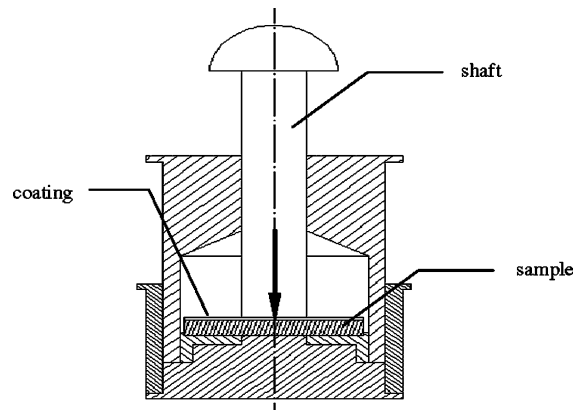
Schematic view of test assembly for the ceramic coatings examination under compression load.
